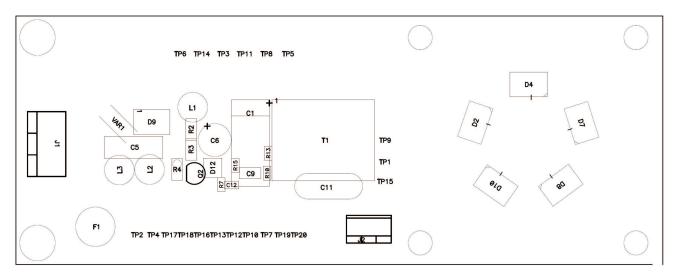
TPS92070EVM-648 Top Layer Assembly Drawing (Top View)
